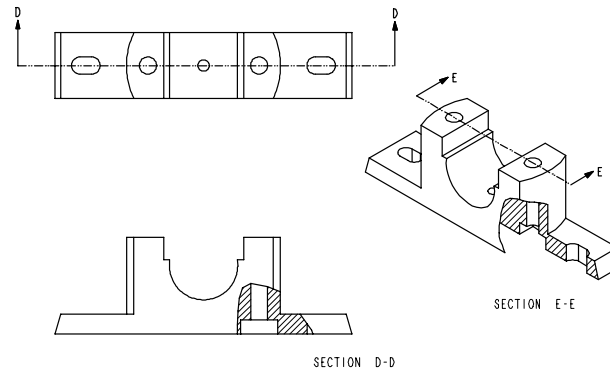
Top view, Local section front view, and Local section isometric view
